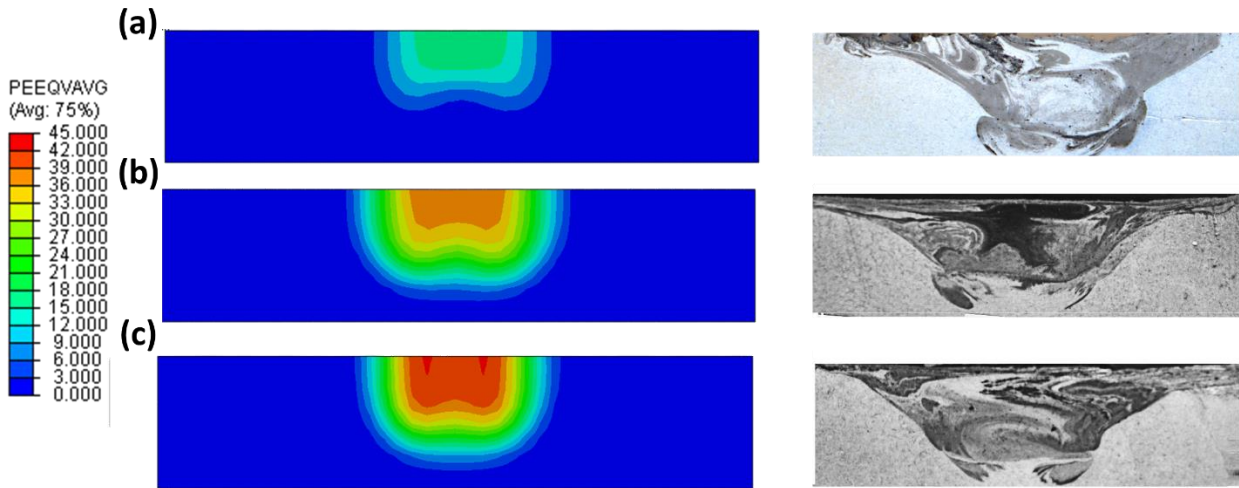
Macro image of the SZ and the strain created in the samples produced with a) circular tool, b) hexagonal tool c) square tool
